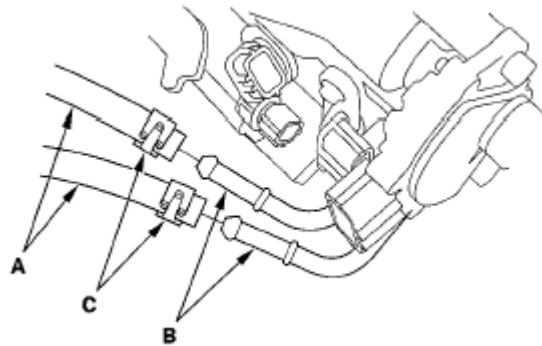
Identifying ATF Cooler Hoses, ATF Cooler Lines And Clips
